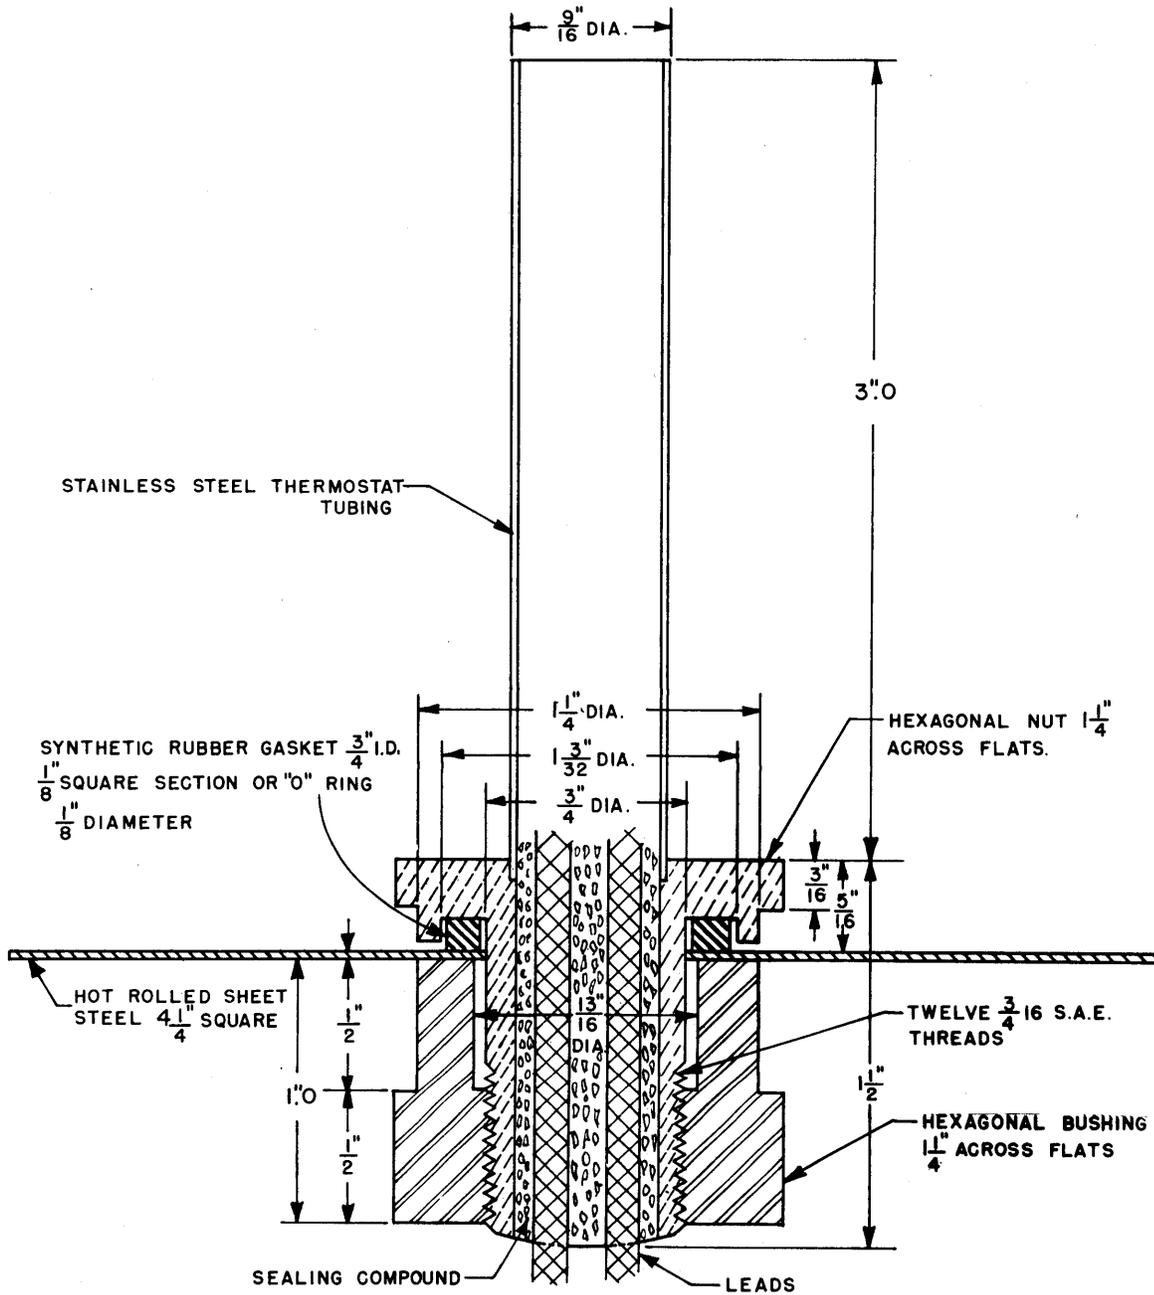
Alternate method of mounting thermostat to sheet steel diaphragm
